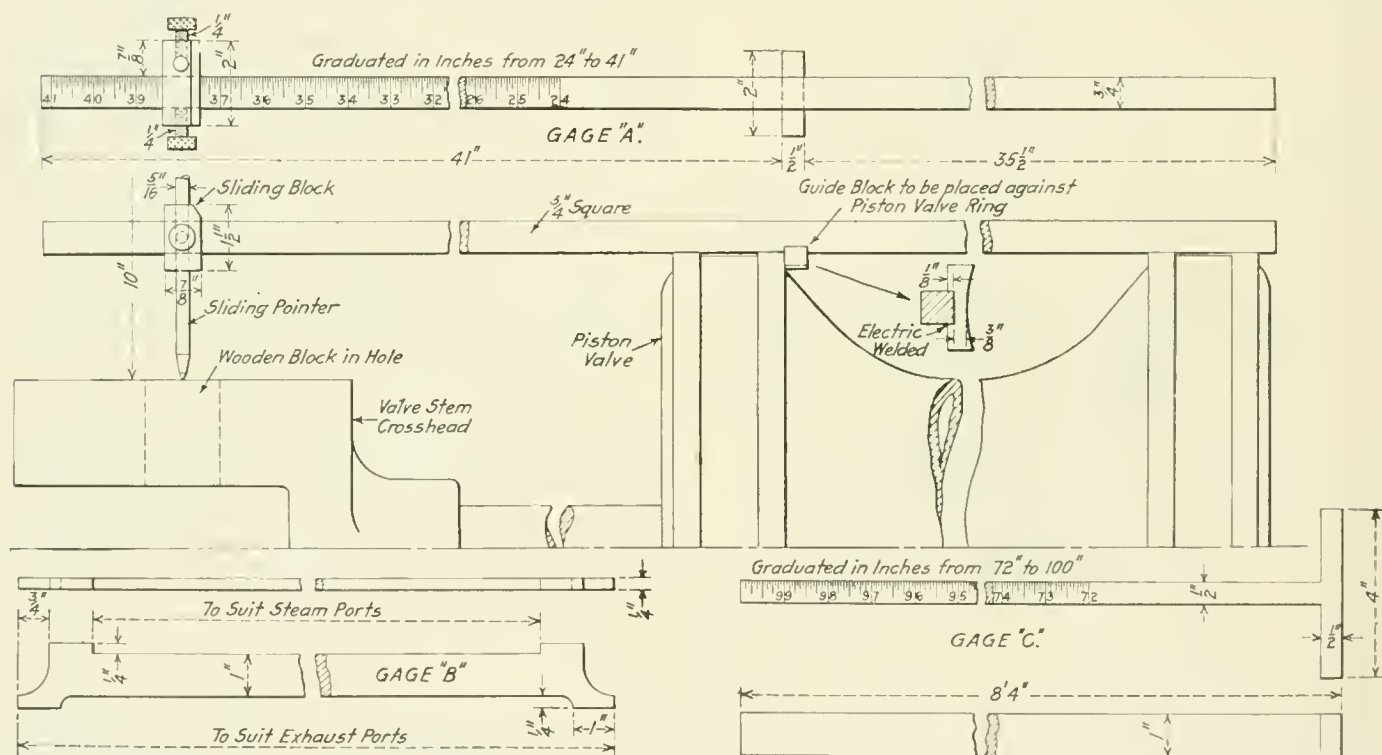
Gages Used in Checking Valve Gear Dimensions at the West Albany Shops
